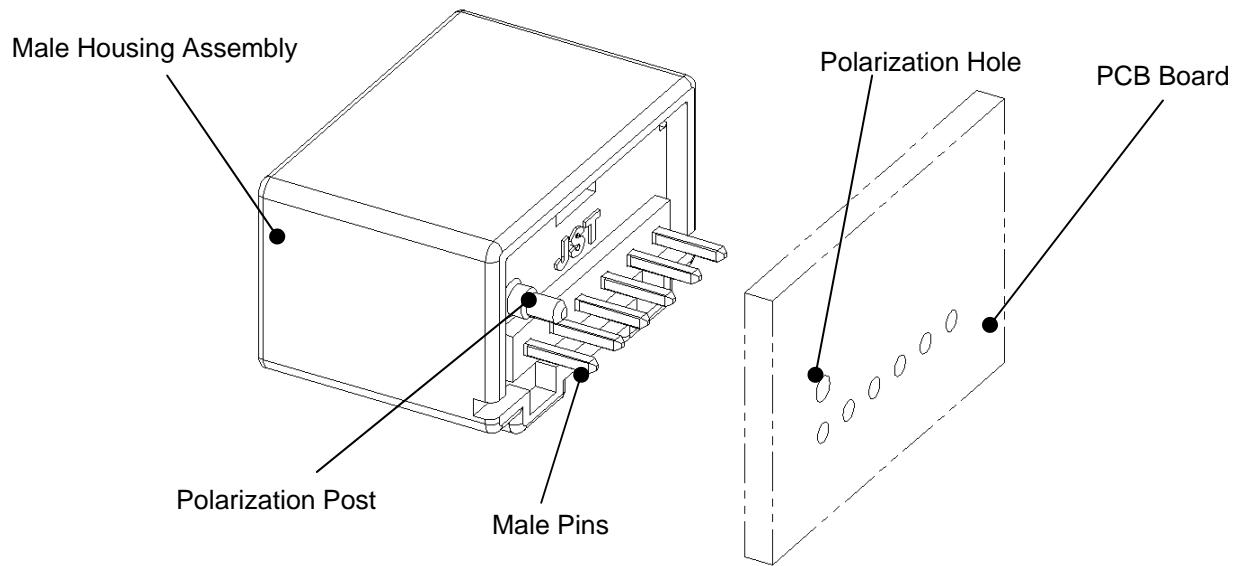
Polarization of the Male Assembly with the PCB Board (e.g. 6 positions)
